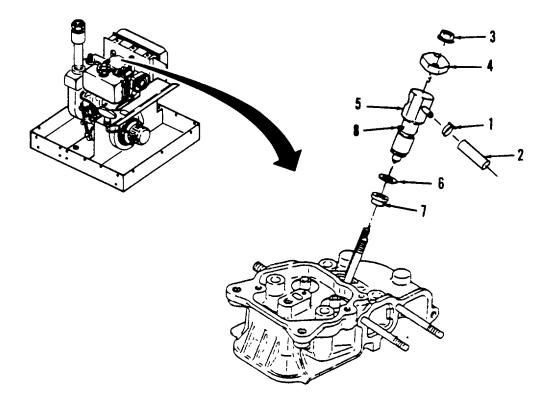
Fuel Injector Valve Assembly Replacement.
